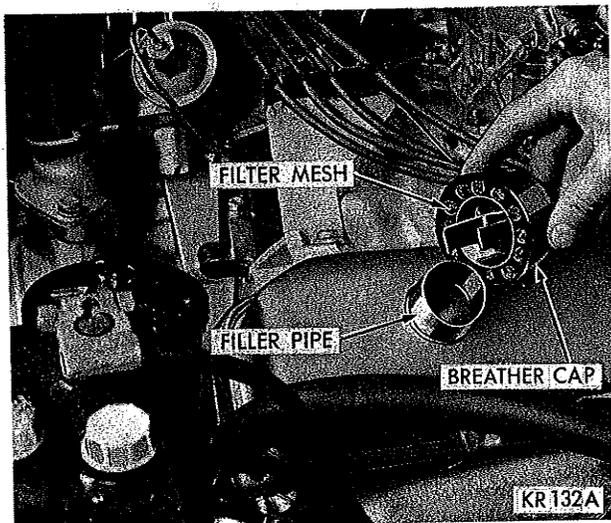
Oil Filler Breather Cap (V-8 Engines)
